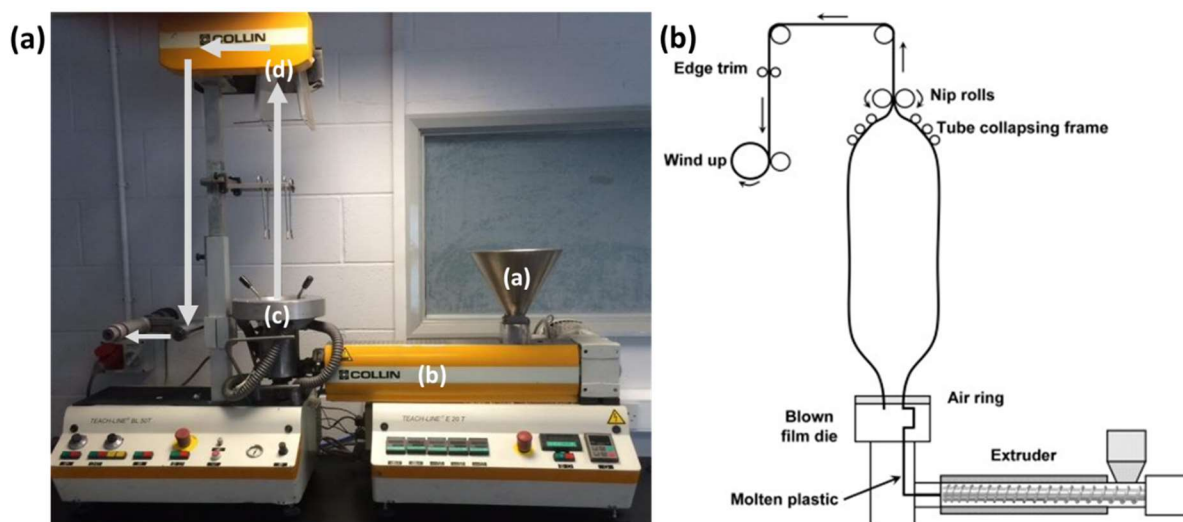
Blown-film extruder apparatus. (a) Collin Tech-line® BL 50T blow film system with a Collin Tech-line® E20T extruder. (A) Hopper, (B) single-screw extruder for material melting and compression, (C) ring die of 30mm diameter and 1mm thick, with a film cooling by air flow, (D) rollers for film pinching and drawing., and (b) corresponding scheme, from ¹⁶. Copyright Elsevier 2017.
